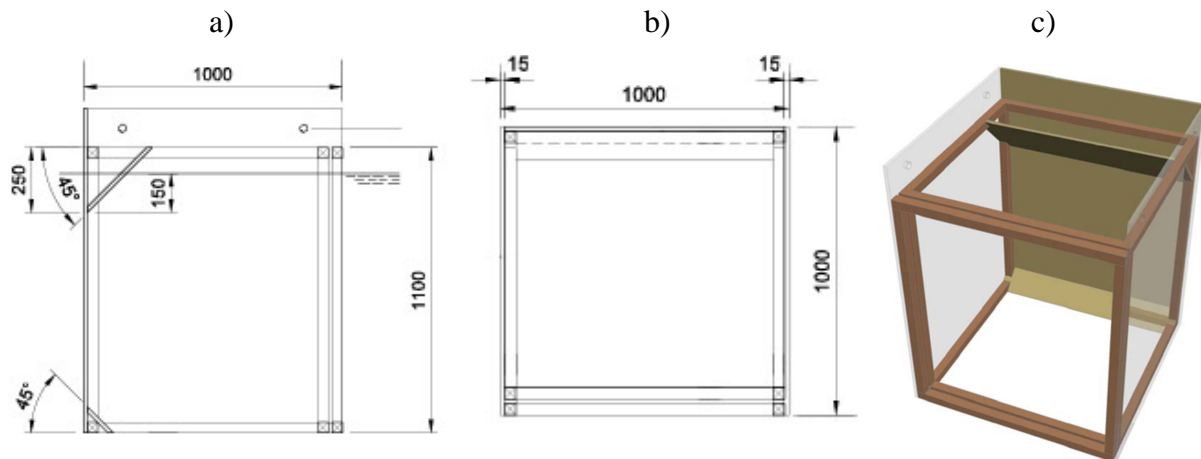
Technical drawing of the buoyancy box, in a) from side, in b) from above, in c) 3D drawing.
